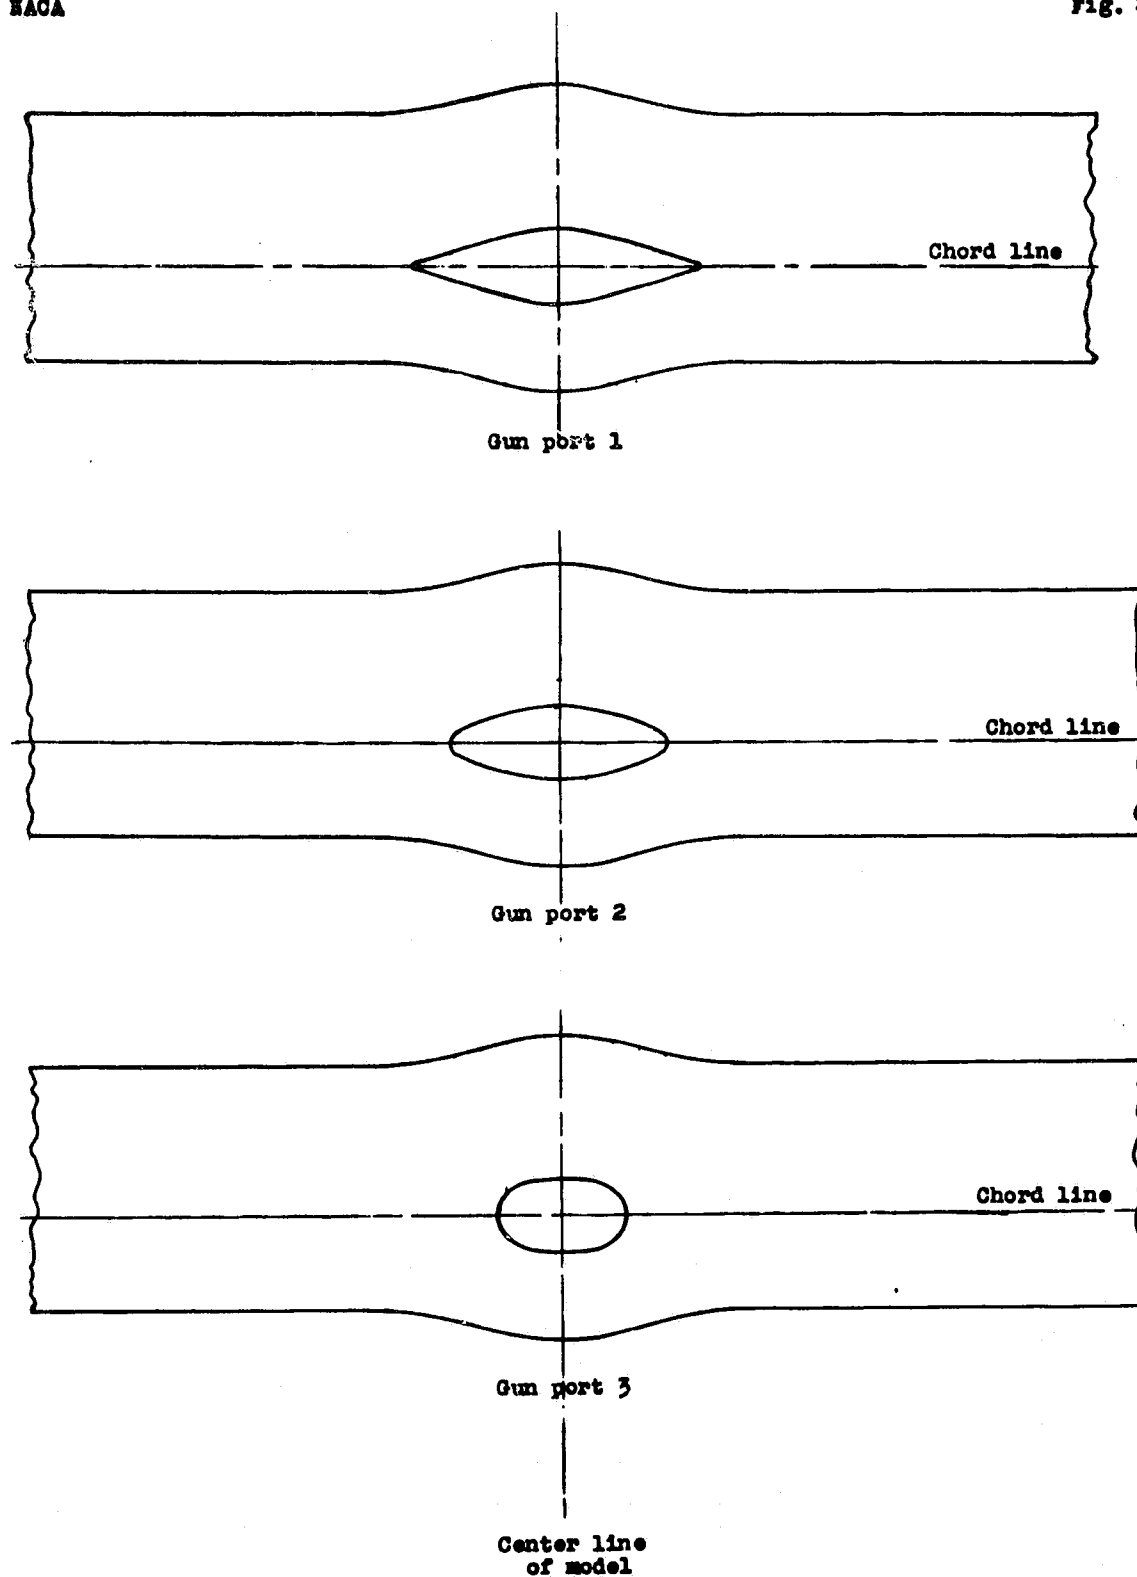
Sketches showing the relative size and shape of three gun ports tested.
